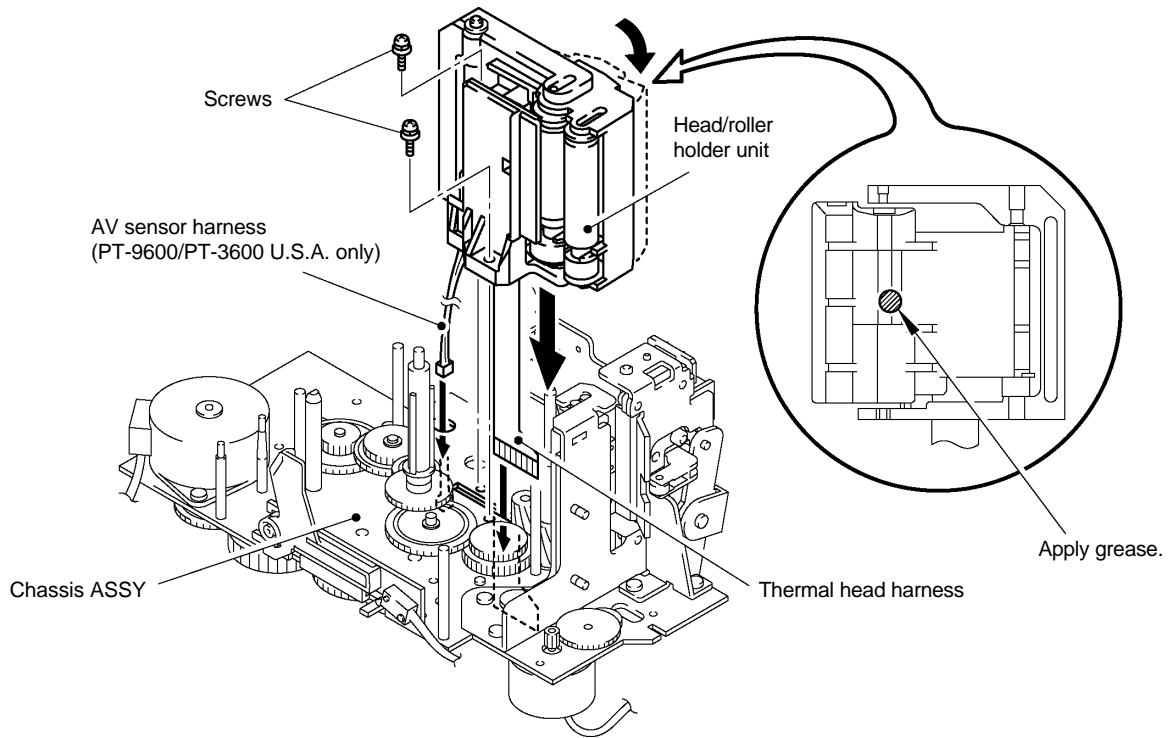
Installing the Head/Roller Holder Unit
